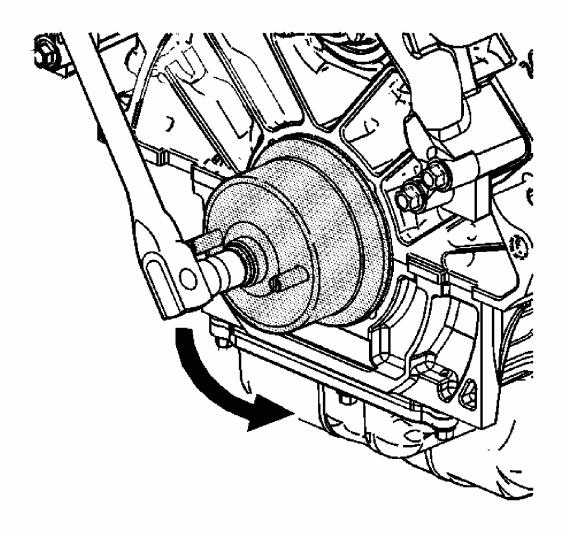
Loosening Seal Installer Center Nut Courtesy of GENERAL MOTORS CORP.
